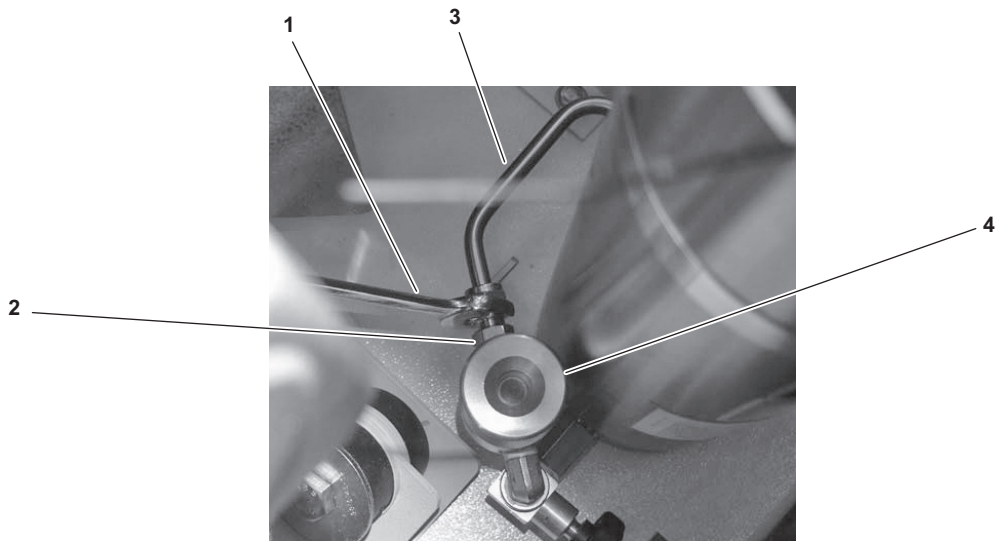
Flare Fitting at CO/H₂O Indicator Housing
